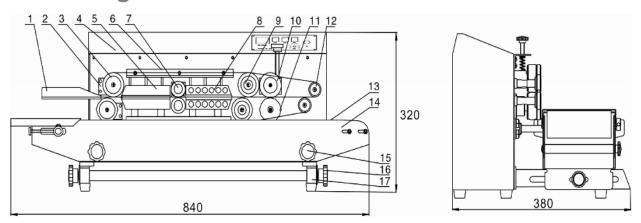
Horizontal Band Sealer (1) Guide, (2) Driven Wheel Seat (Adjusting Block), (3) Driven Wheel, (4) Control Panel, (5) Heating Block, (6) Holding Plate, (7) Pinch Roller, (8) Cooling Block, (9) Driving Wheel, (10) Embossing Roller, (11) Silicone Wheel, (12) Guiding Wheel, (13) Conveyor Belt, (14) Conveyor Table, (15) Fastening Knob for Elevating Table, (16) Transverse Tightening Knob for Conveyor Table, (17) Conveyor Support
